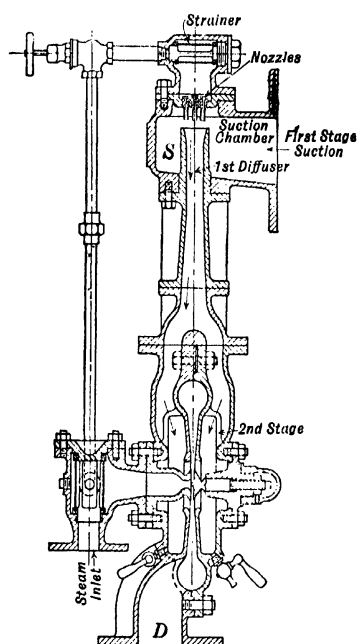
Cross-sectional View of Radojet Vacuum Pump.
